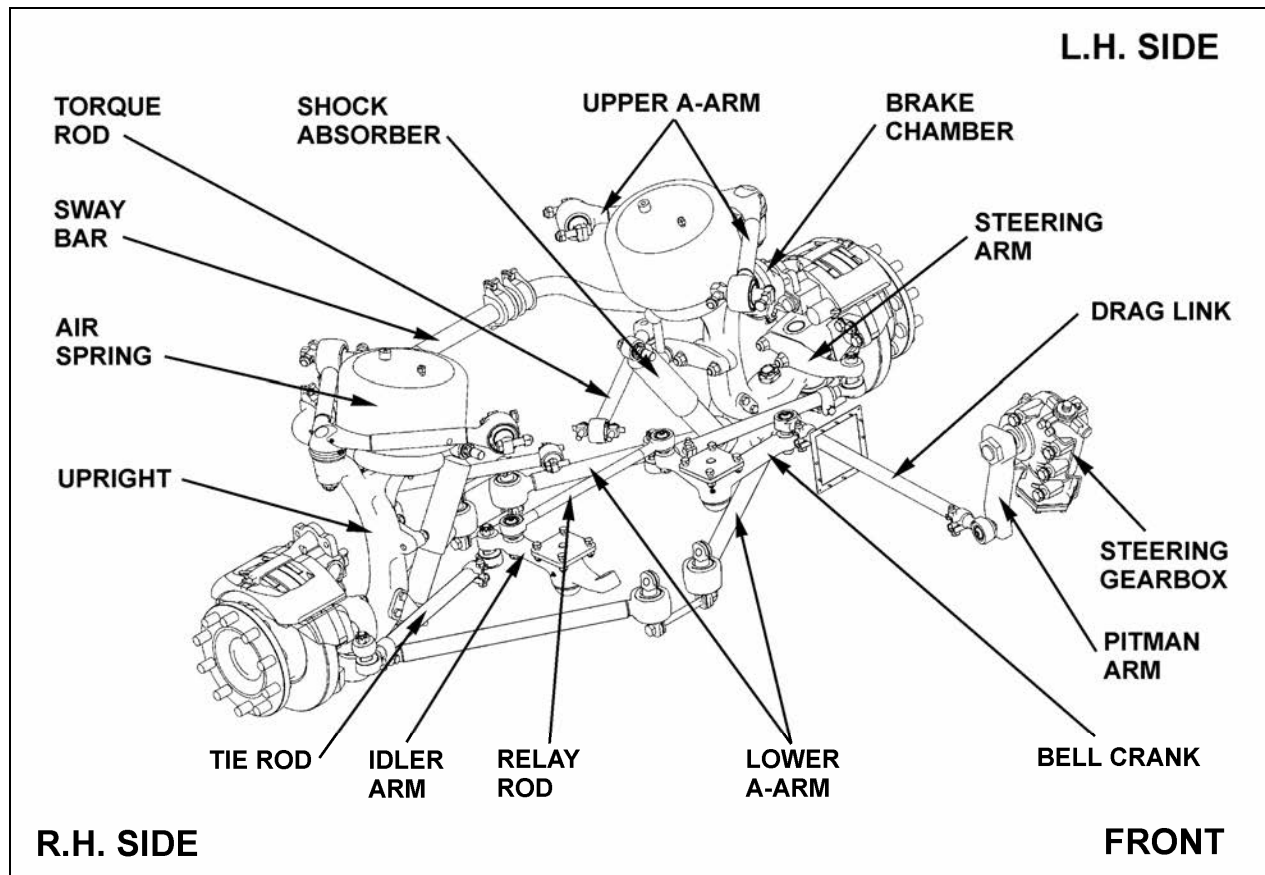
SUSPENSION AND STEERING LINKAGE
